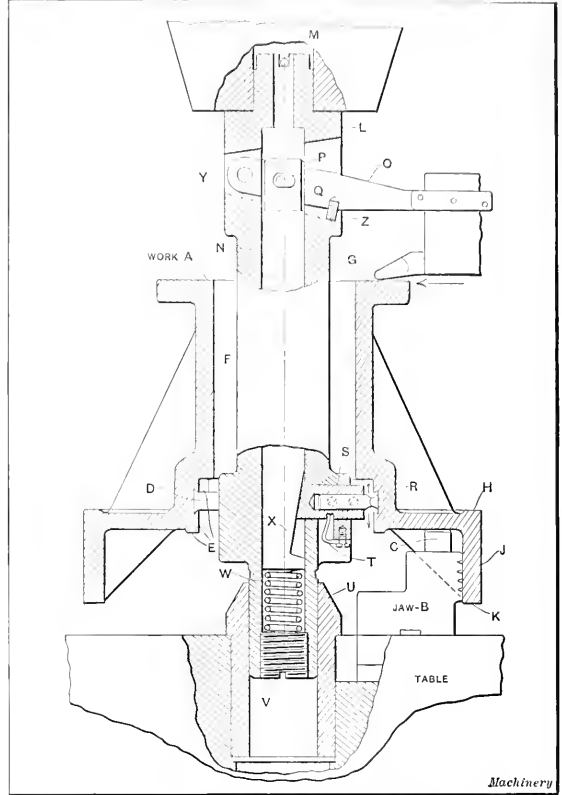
A Recessing Tool cutting a Dovetail-Shaped Recess
